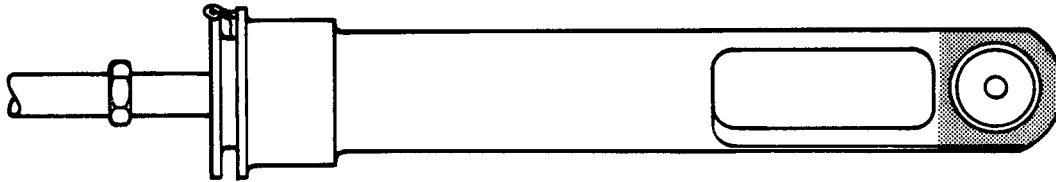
Force gradient assembly — adjustment (Sheet 1 of 2)
